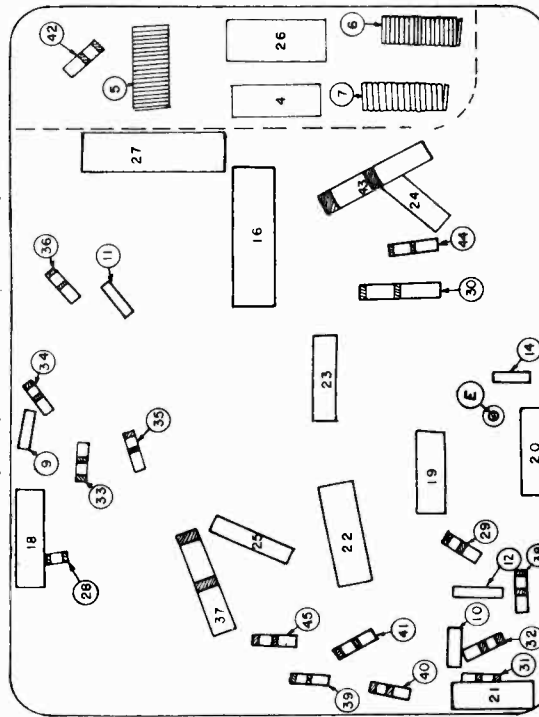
Parts Layout-Bottom View-Cadillac 1940 Rear Compartment Radio
